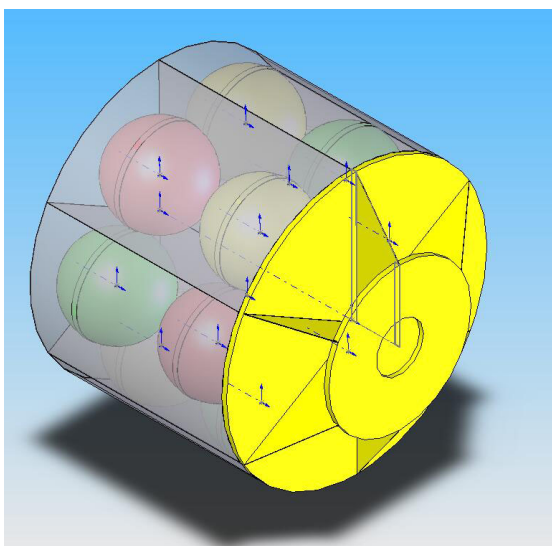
Partitioned Service modules with internal spherical tank assembly and docking adapter.
